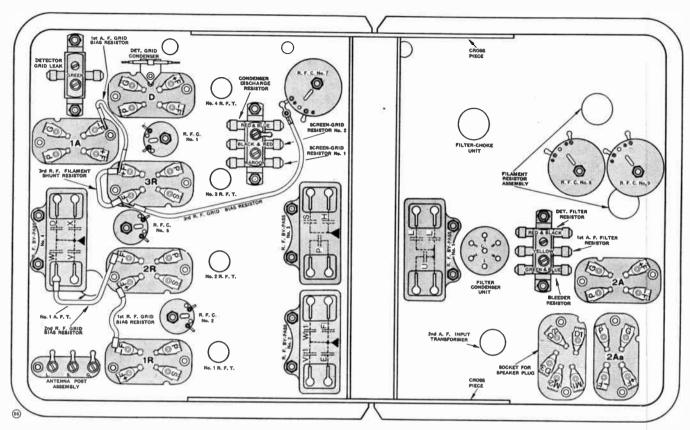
Bottom View of Type D Chassis. In later-type D chassis, a line fuse (2 amperes) is mounted at the right of R. F. by-pass No. 1.
